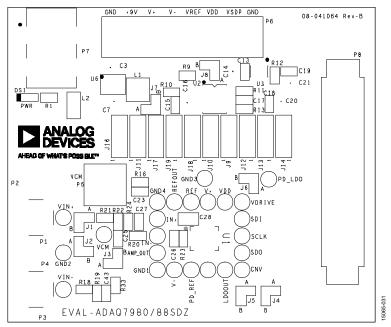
EVAL-ADAQ7980SDZ Evaluation Board Silkscreen—Top Assembly
